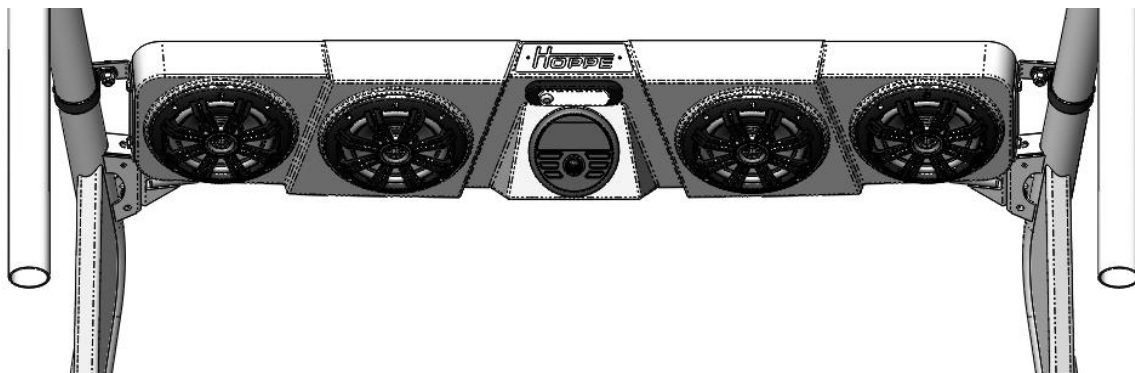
Hardware for mounting the loop clamps to the brackets.
